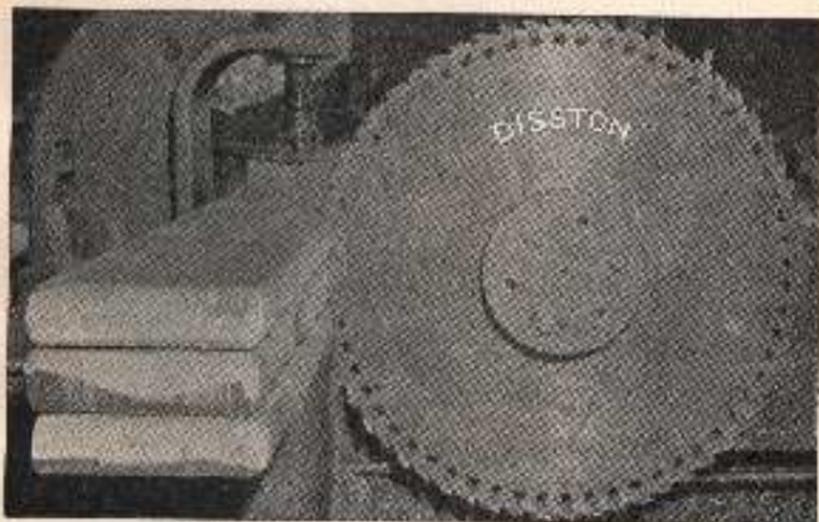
Fifty-inch inserted tooth metal cutting saw.
